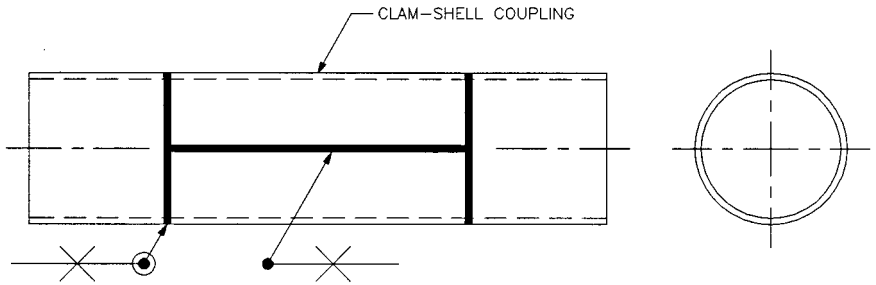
Cross-sectional view of an assembled clam-shell coupling.
